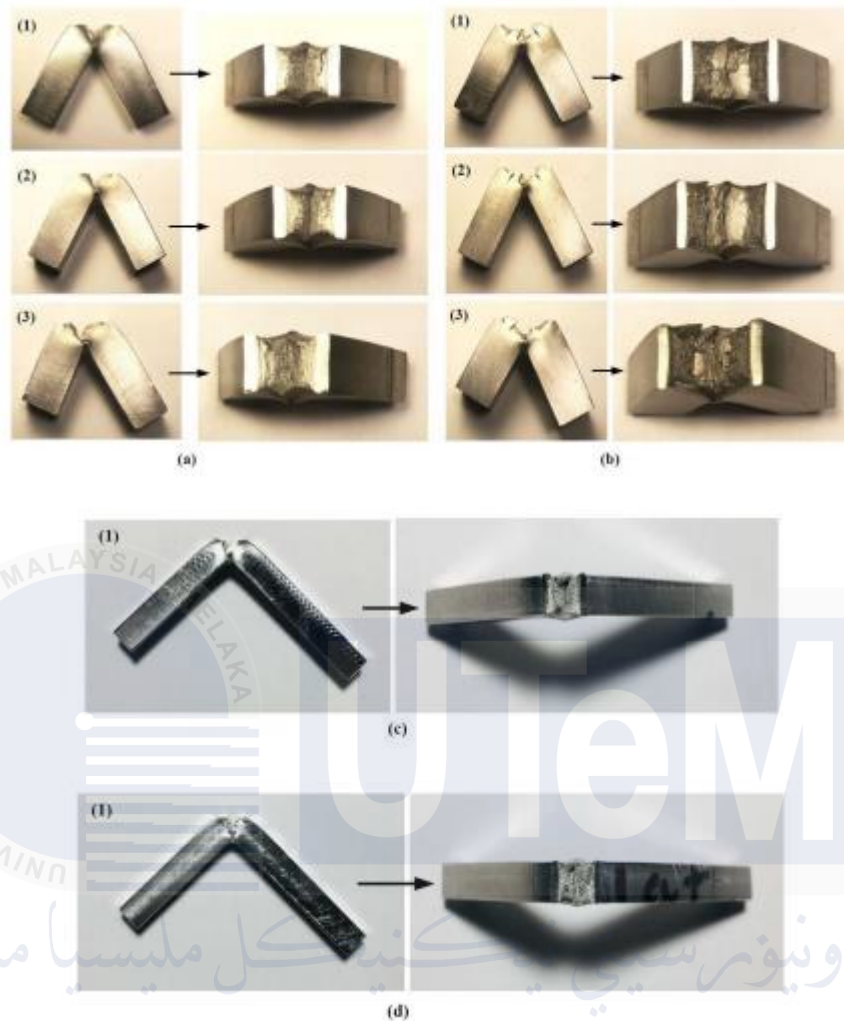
Fracture surface images of (a) as-received specimen (b) repaired specimen (c) AM (subsize) specimen (d) repaired (subsize) specimen. [AR= As-Received; RS= Repaired Specimen; AM=Additive Manufactured]
